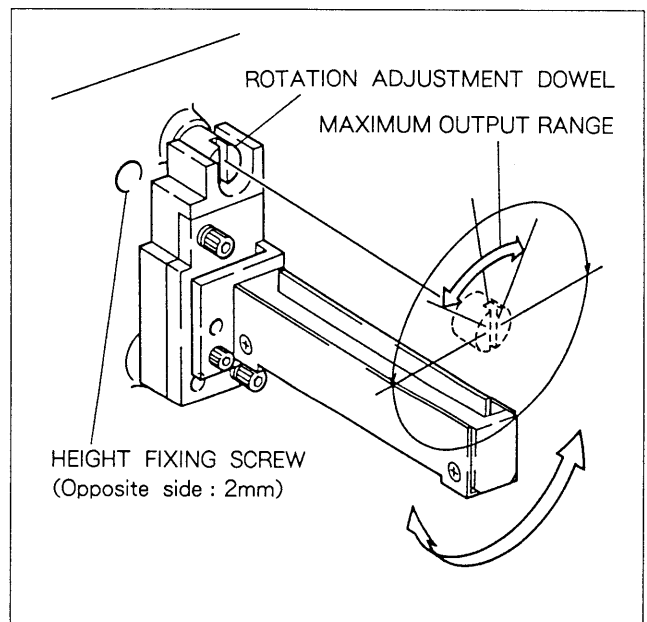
Audio REC Head Rotation Adjustment
